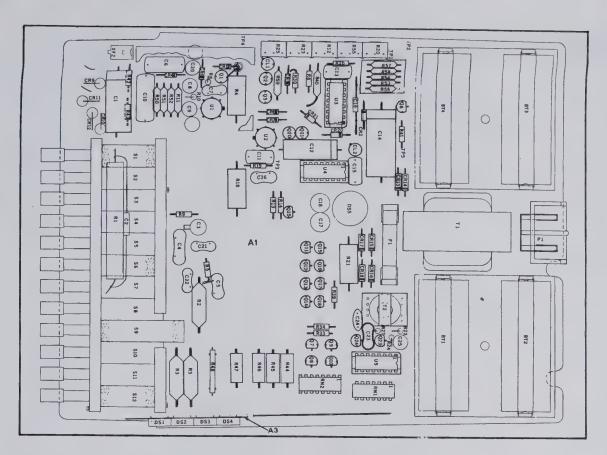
8000A--01 MAIN PCB ASSEMBLY
